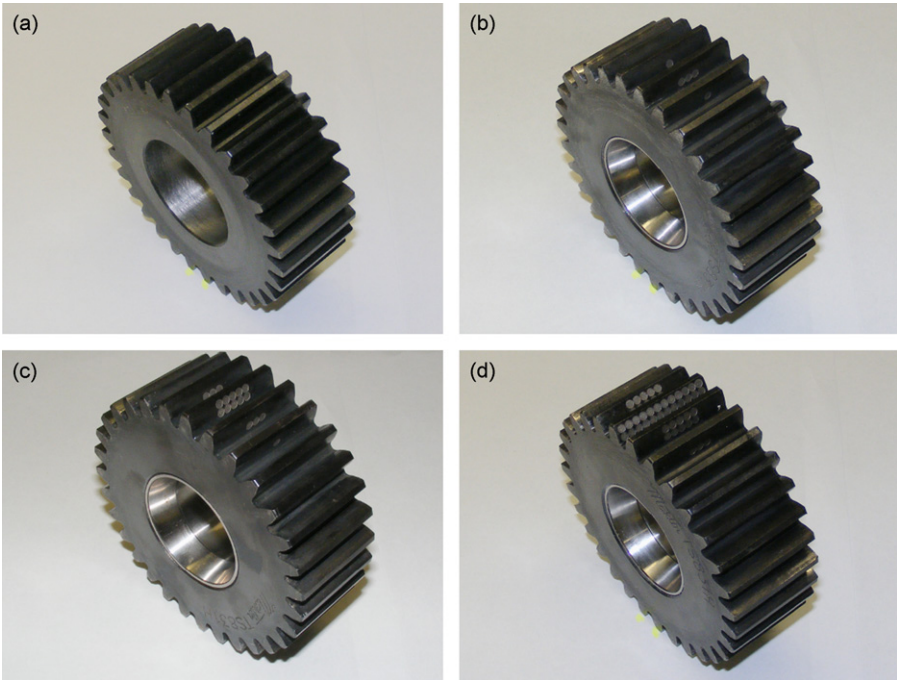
Planet gears with manually created pitting damage: (a) baseline, (b) slight, (c) moderate and (d) severe.
